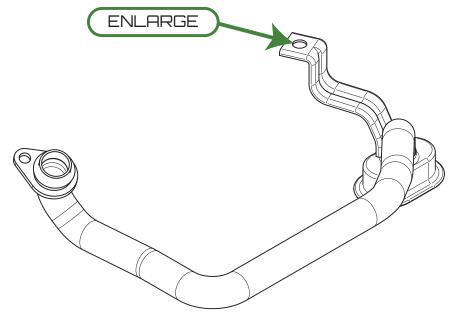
Hole to Enlarge on the Pickup Tube (Screen)
